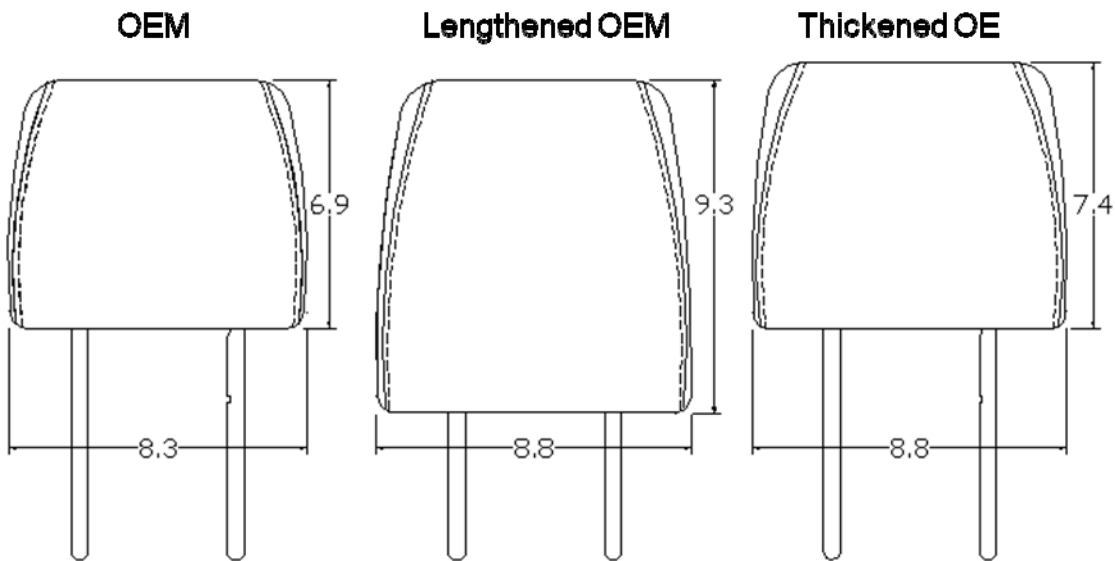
Front view drawing of three head restraint conditions (units: inches).
